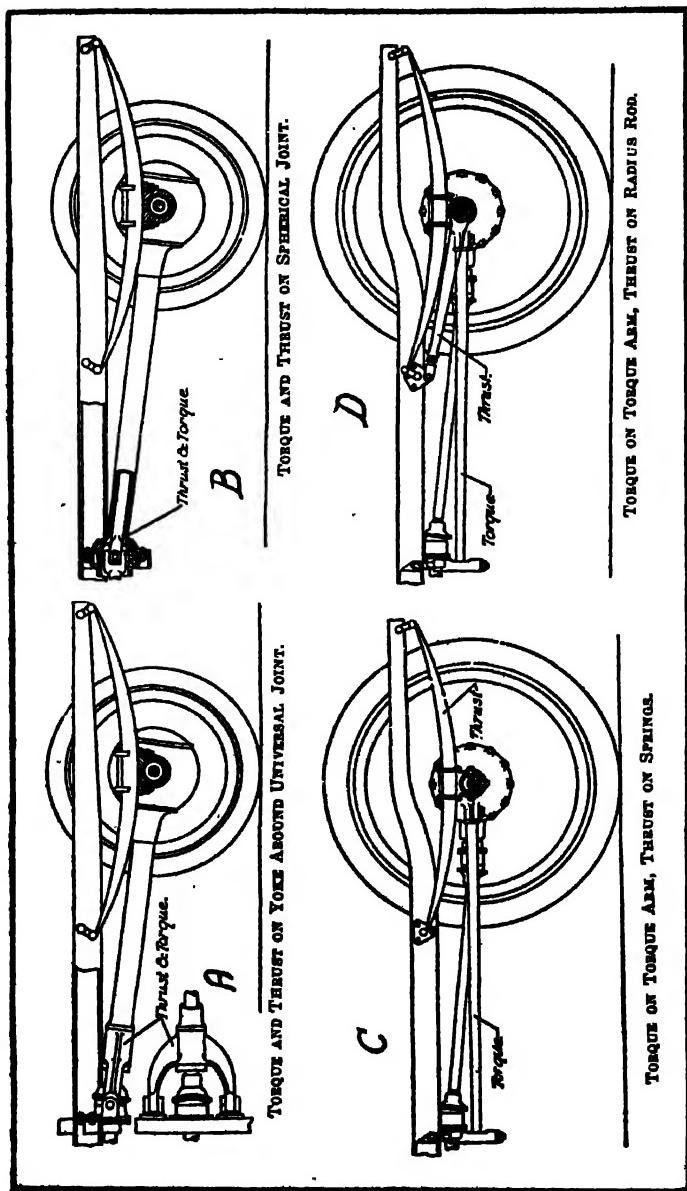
Conventional Method of Taking Driving Thrust and Braking and Driving Torque in Modern Automobiles.
